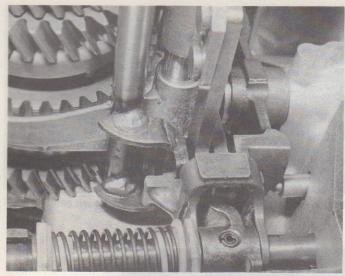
Selector shaft fitting details - early type (Sec 17)
